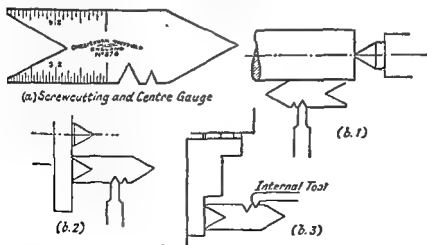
Screw-cutting Tool (for Vee Threads).
